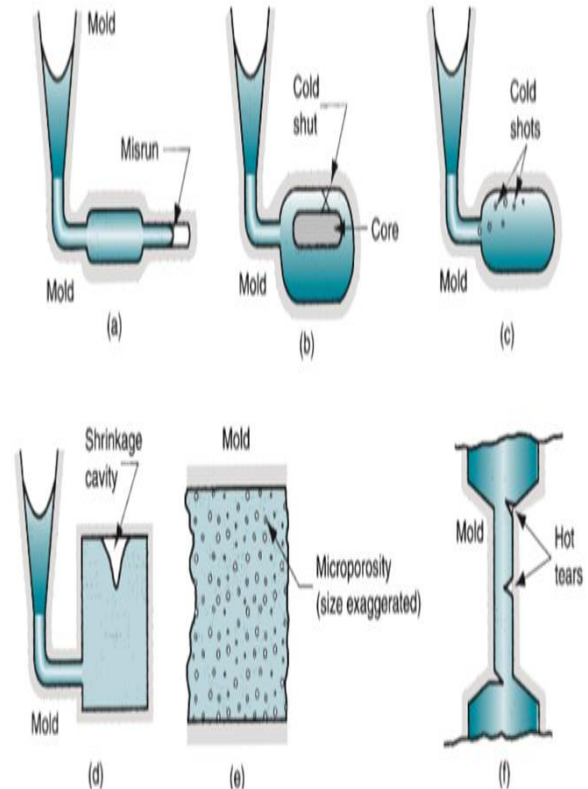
Some common defects in castings: (a) misrun, (b) cold shut, (c) cold shot, (d) shrinkage cavity, (e) microporosity, and (f) hot tearing.
